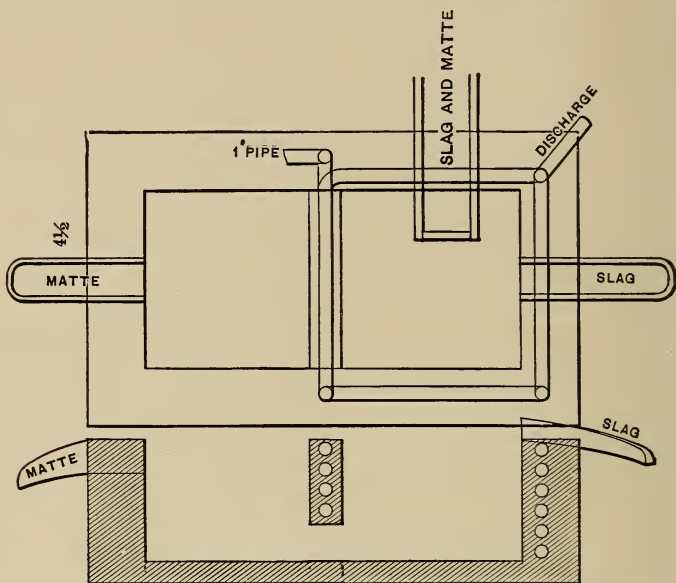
PLAN AND SECTION OF SETTLER USED AT ANACONDA.
